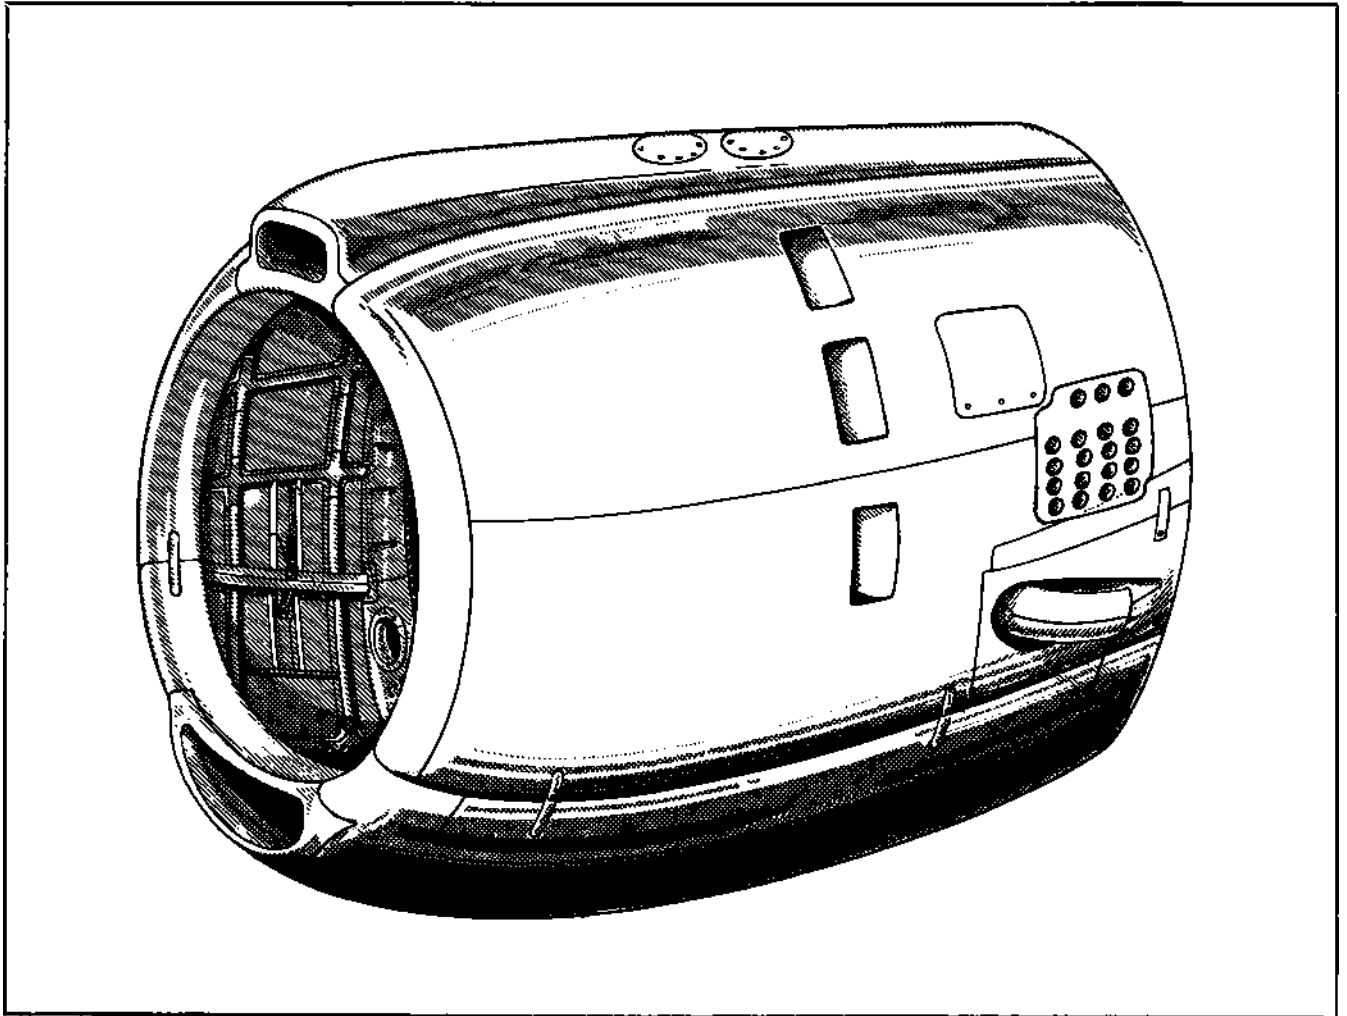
(SHEET 1 of 2 SHEETS) — ENGINE COWL STRUCTURE
